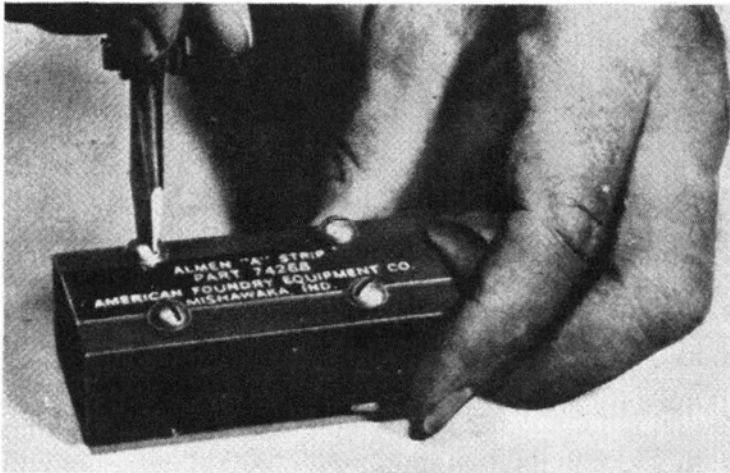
THE ALMEN TEST STRIP HOLDER
